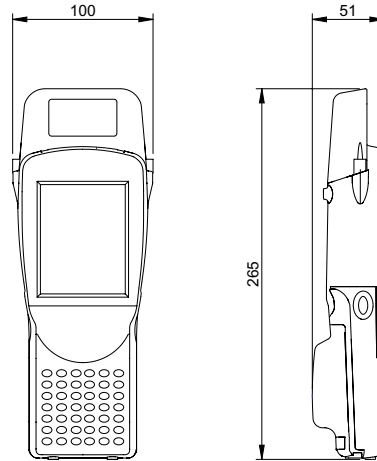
BIS U-870-1-008-X-000 dimensions (in mm)
